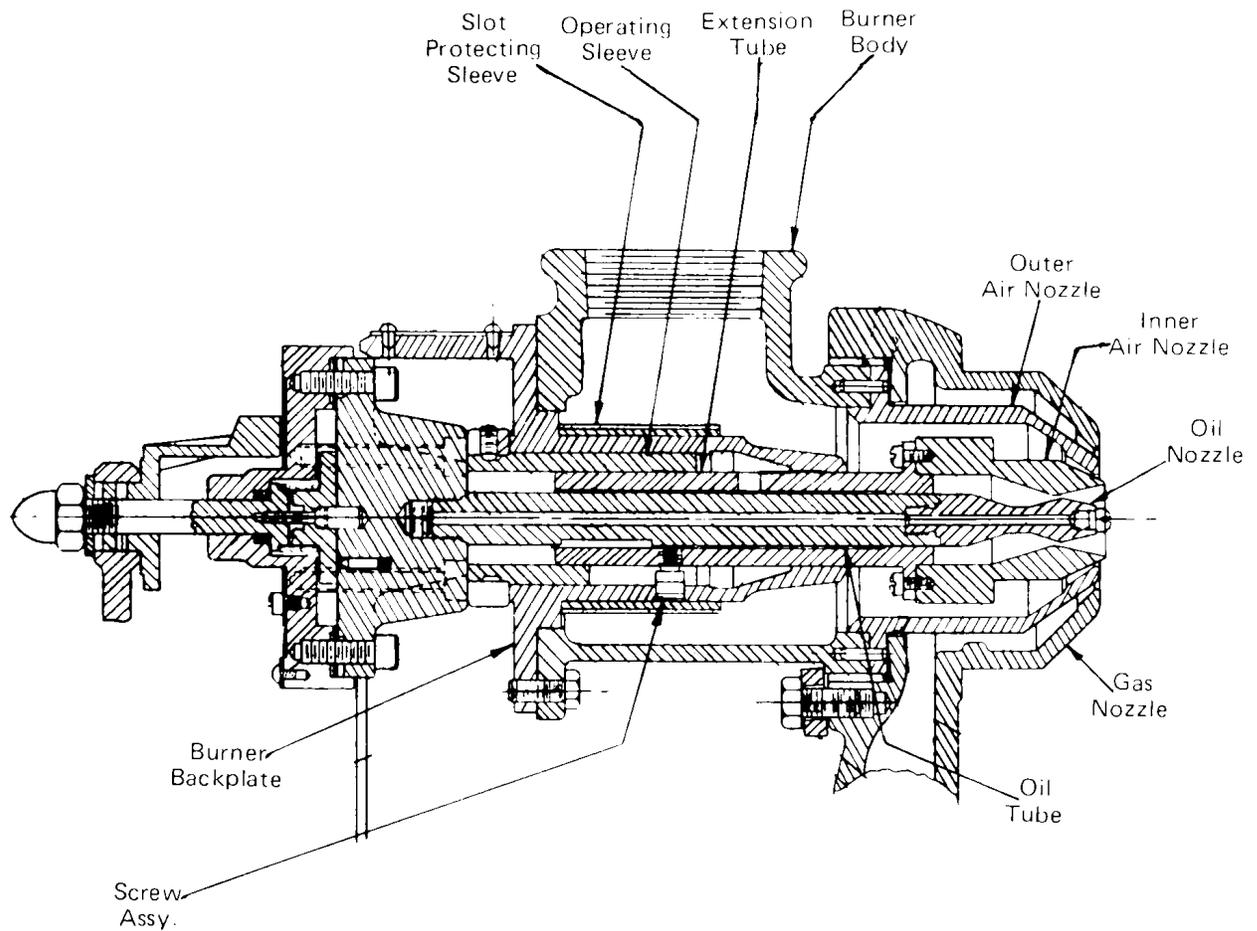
Cutaway View Of The 780 Seires Burner Assembly Showing The Individual Components.
